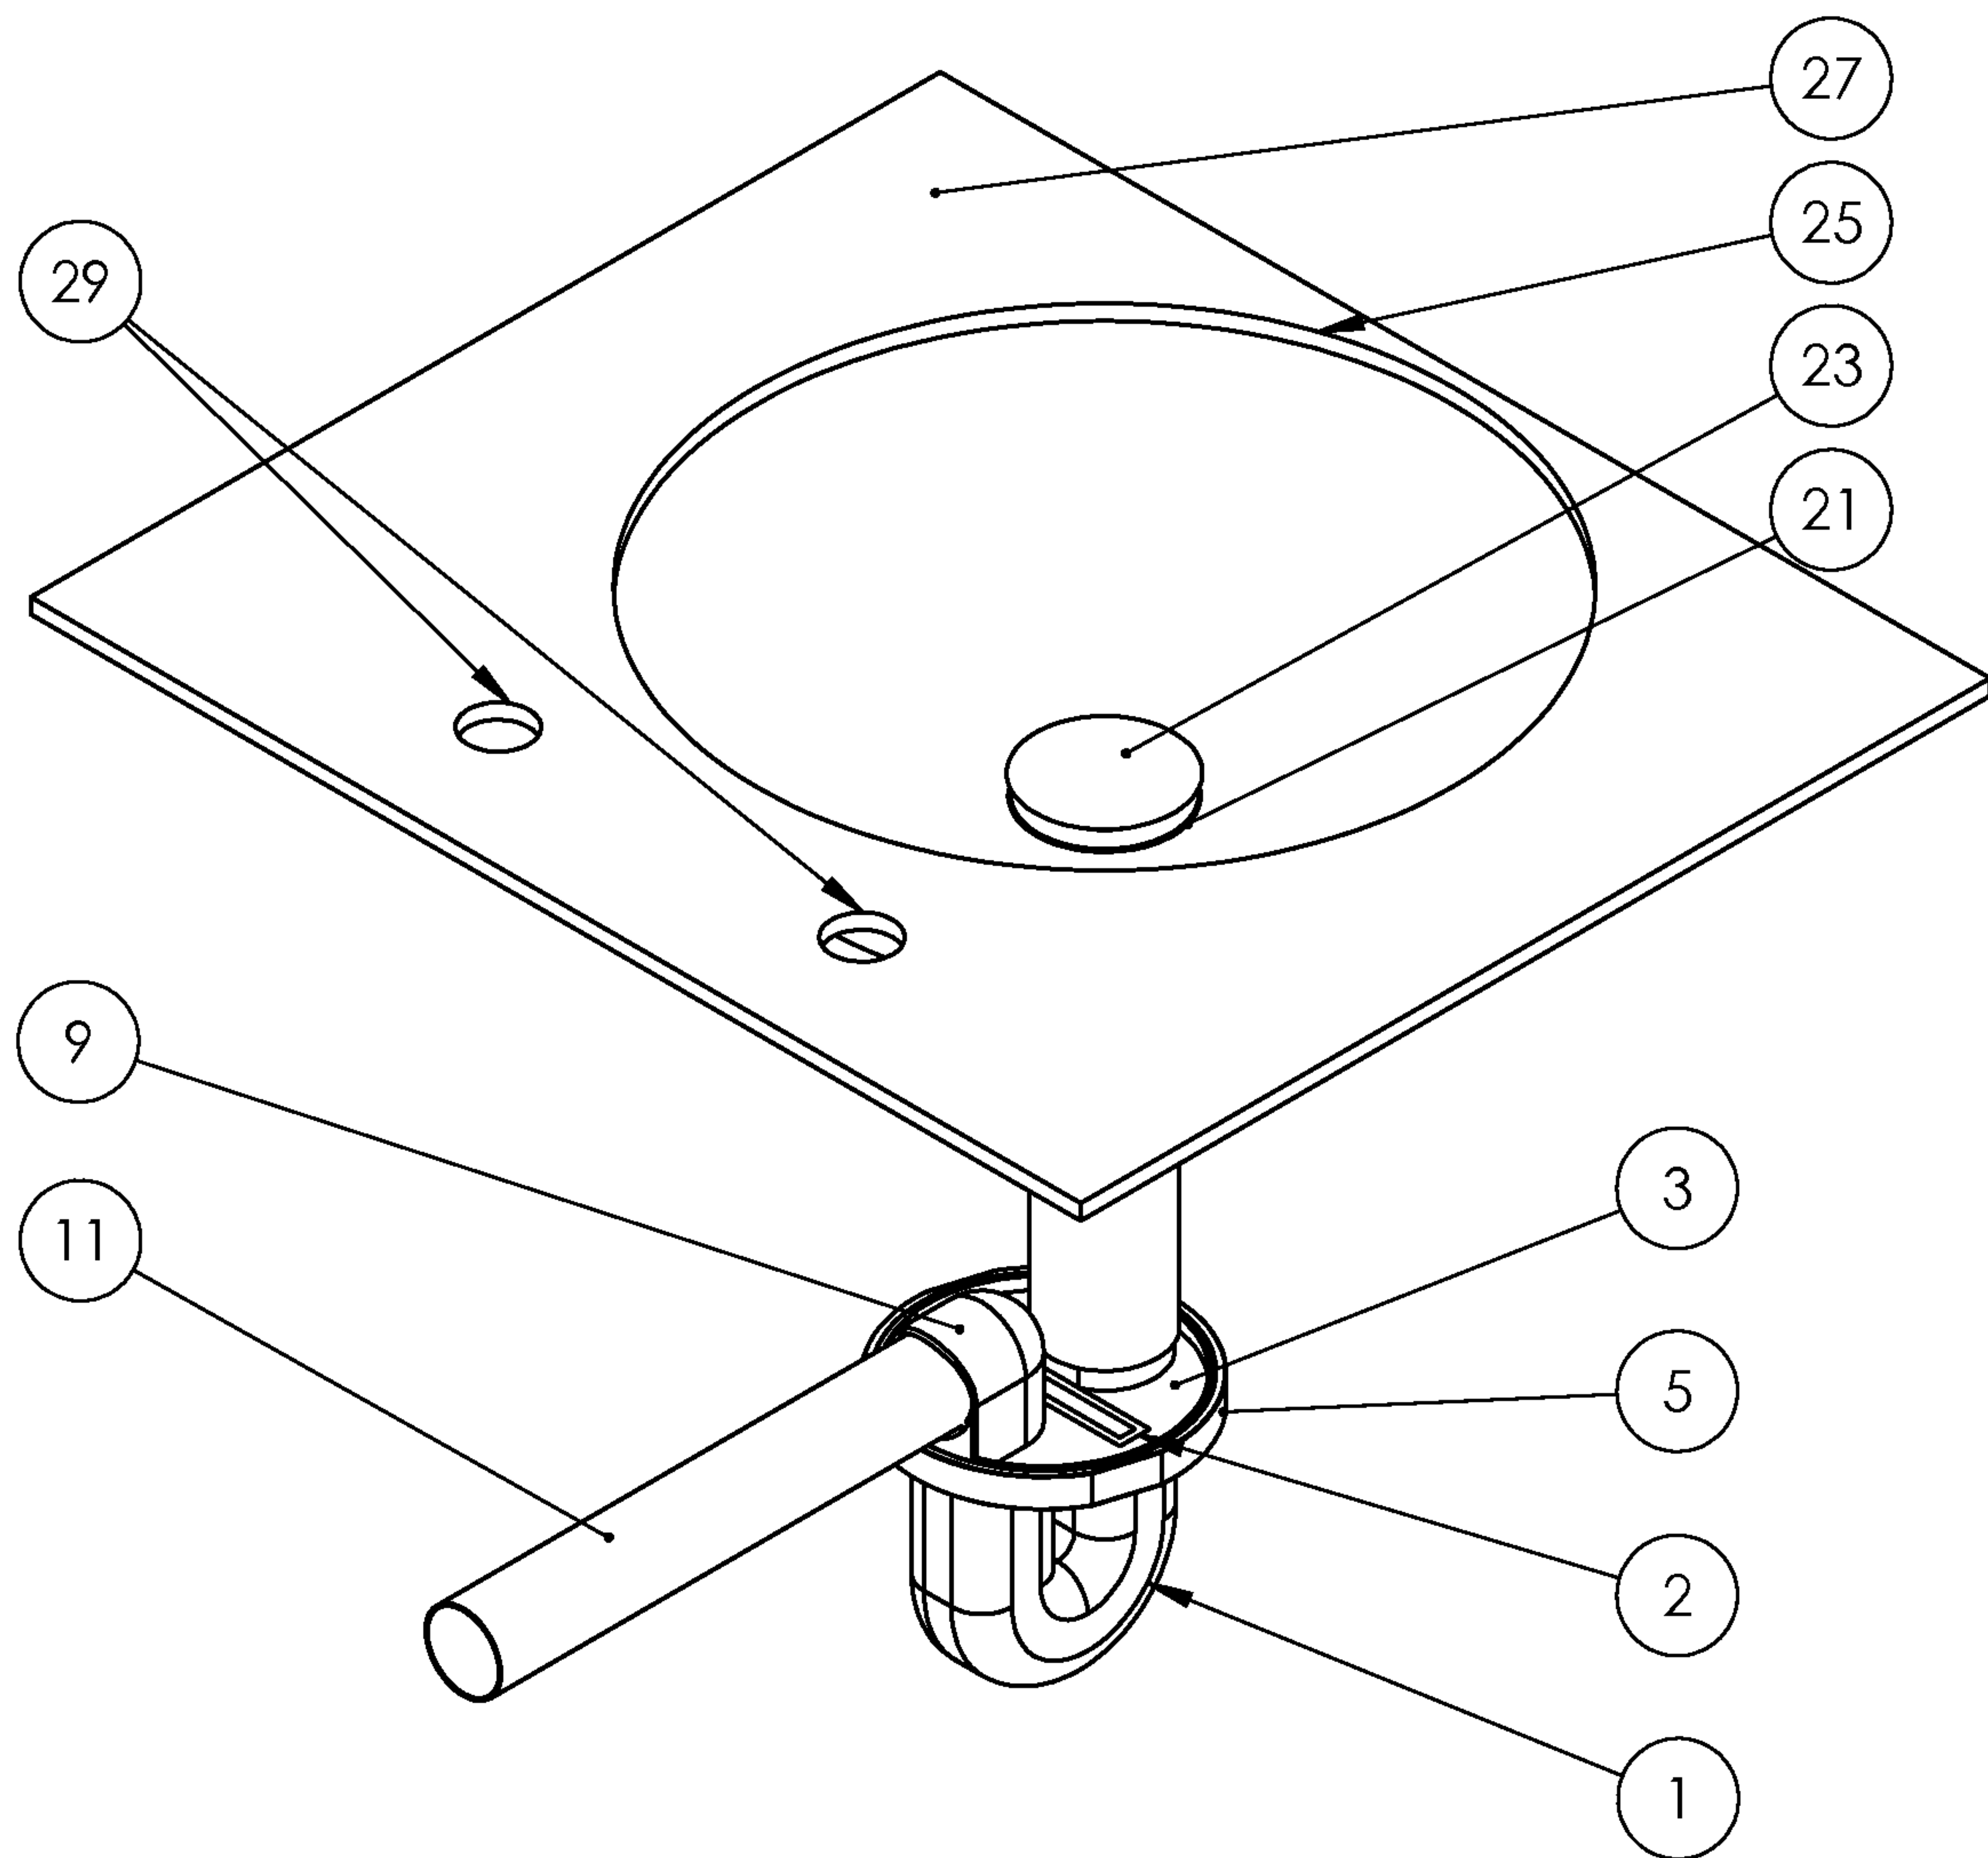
Isometric view of removable trap system attached to the underside of a lavatory sink fitting.
